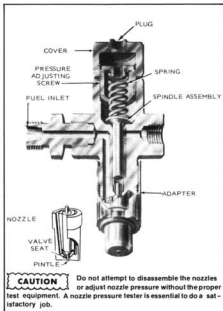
INJECTOR NOZZLE HOLDER
